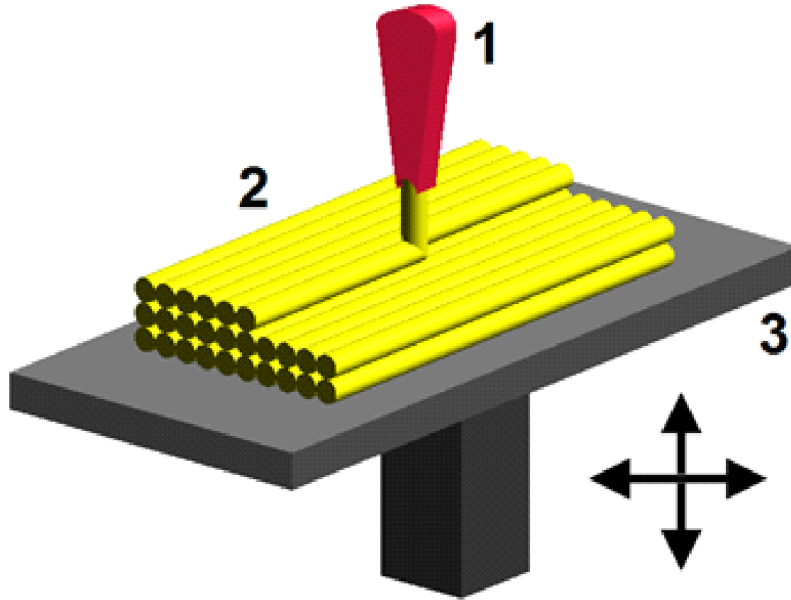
Fused deposition modeling system: (1) nozzle ejecting molten material; (2) deposited material (modeled part); (3) controlled movable table.
